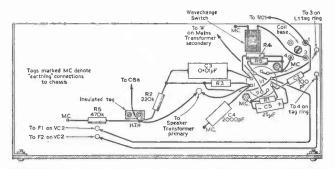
Underchassis wiring. As an alternative arrangement, S1 and S2 could be mounted on the side of the cabinet.
